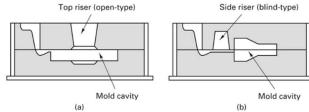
Schematic of a sand casting mould, showing a) an open-type top riser and b) a blind-type side riser. The side riser is a live riser, receiving the last hot metal to enter the mould. The top riser is a dead riser, receiving metal that has flowed through the mould cavity.
